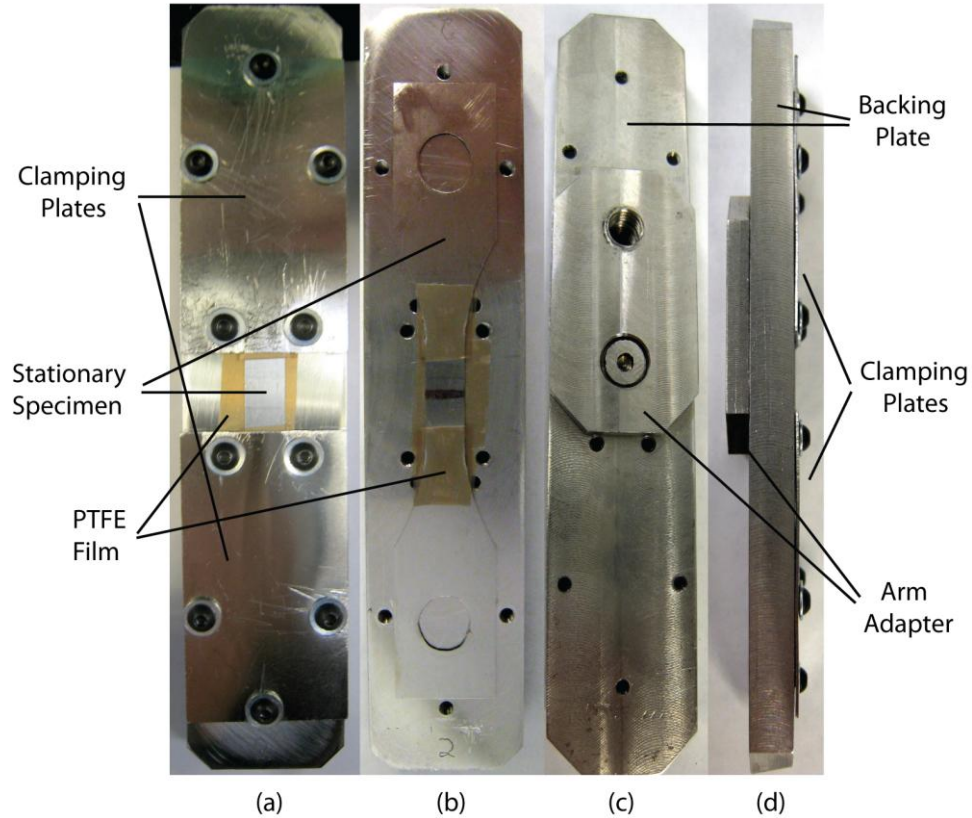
Stationary specimen holder showing the (a) top view of unfretted specimen with clamping plates in place, (b) top view of fretted specimen with clamping plates removed, (c) back view, and (d) side view.
